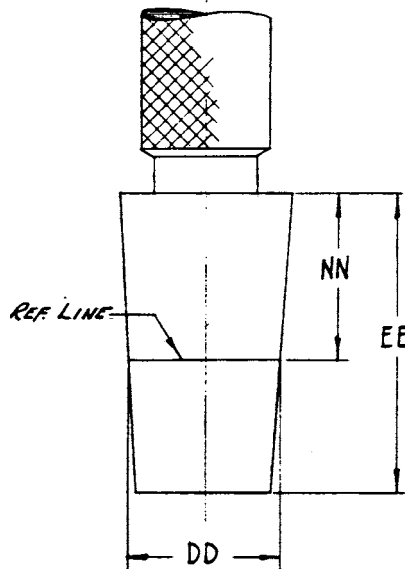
Master Plug Gage for Single Straight-Bore Stopcocks
